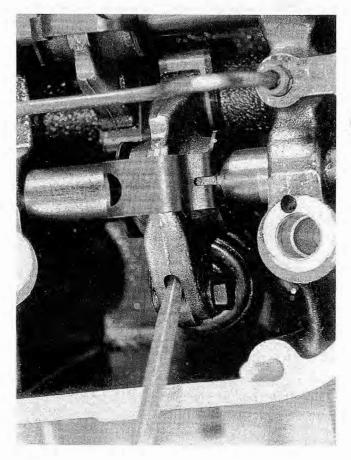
No. 1 intake valve rocker arm being depressed with screwdriver.
